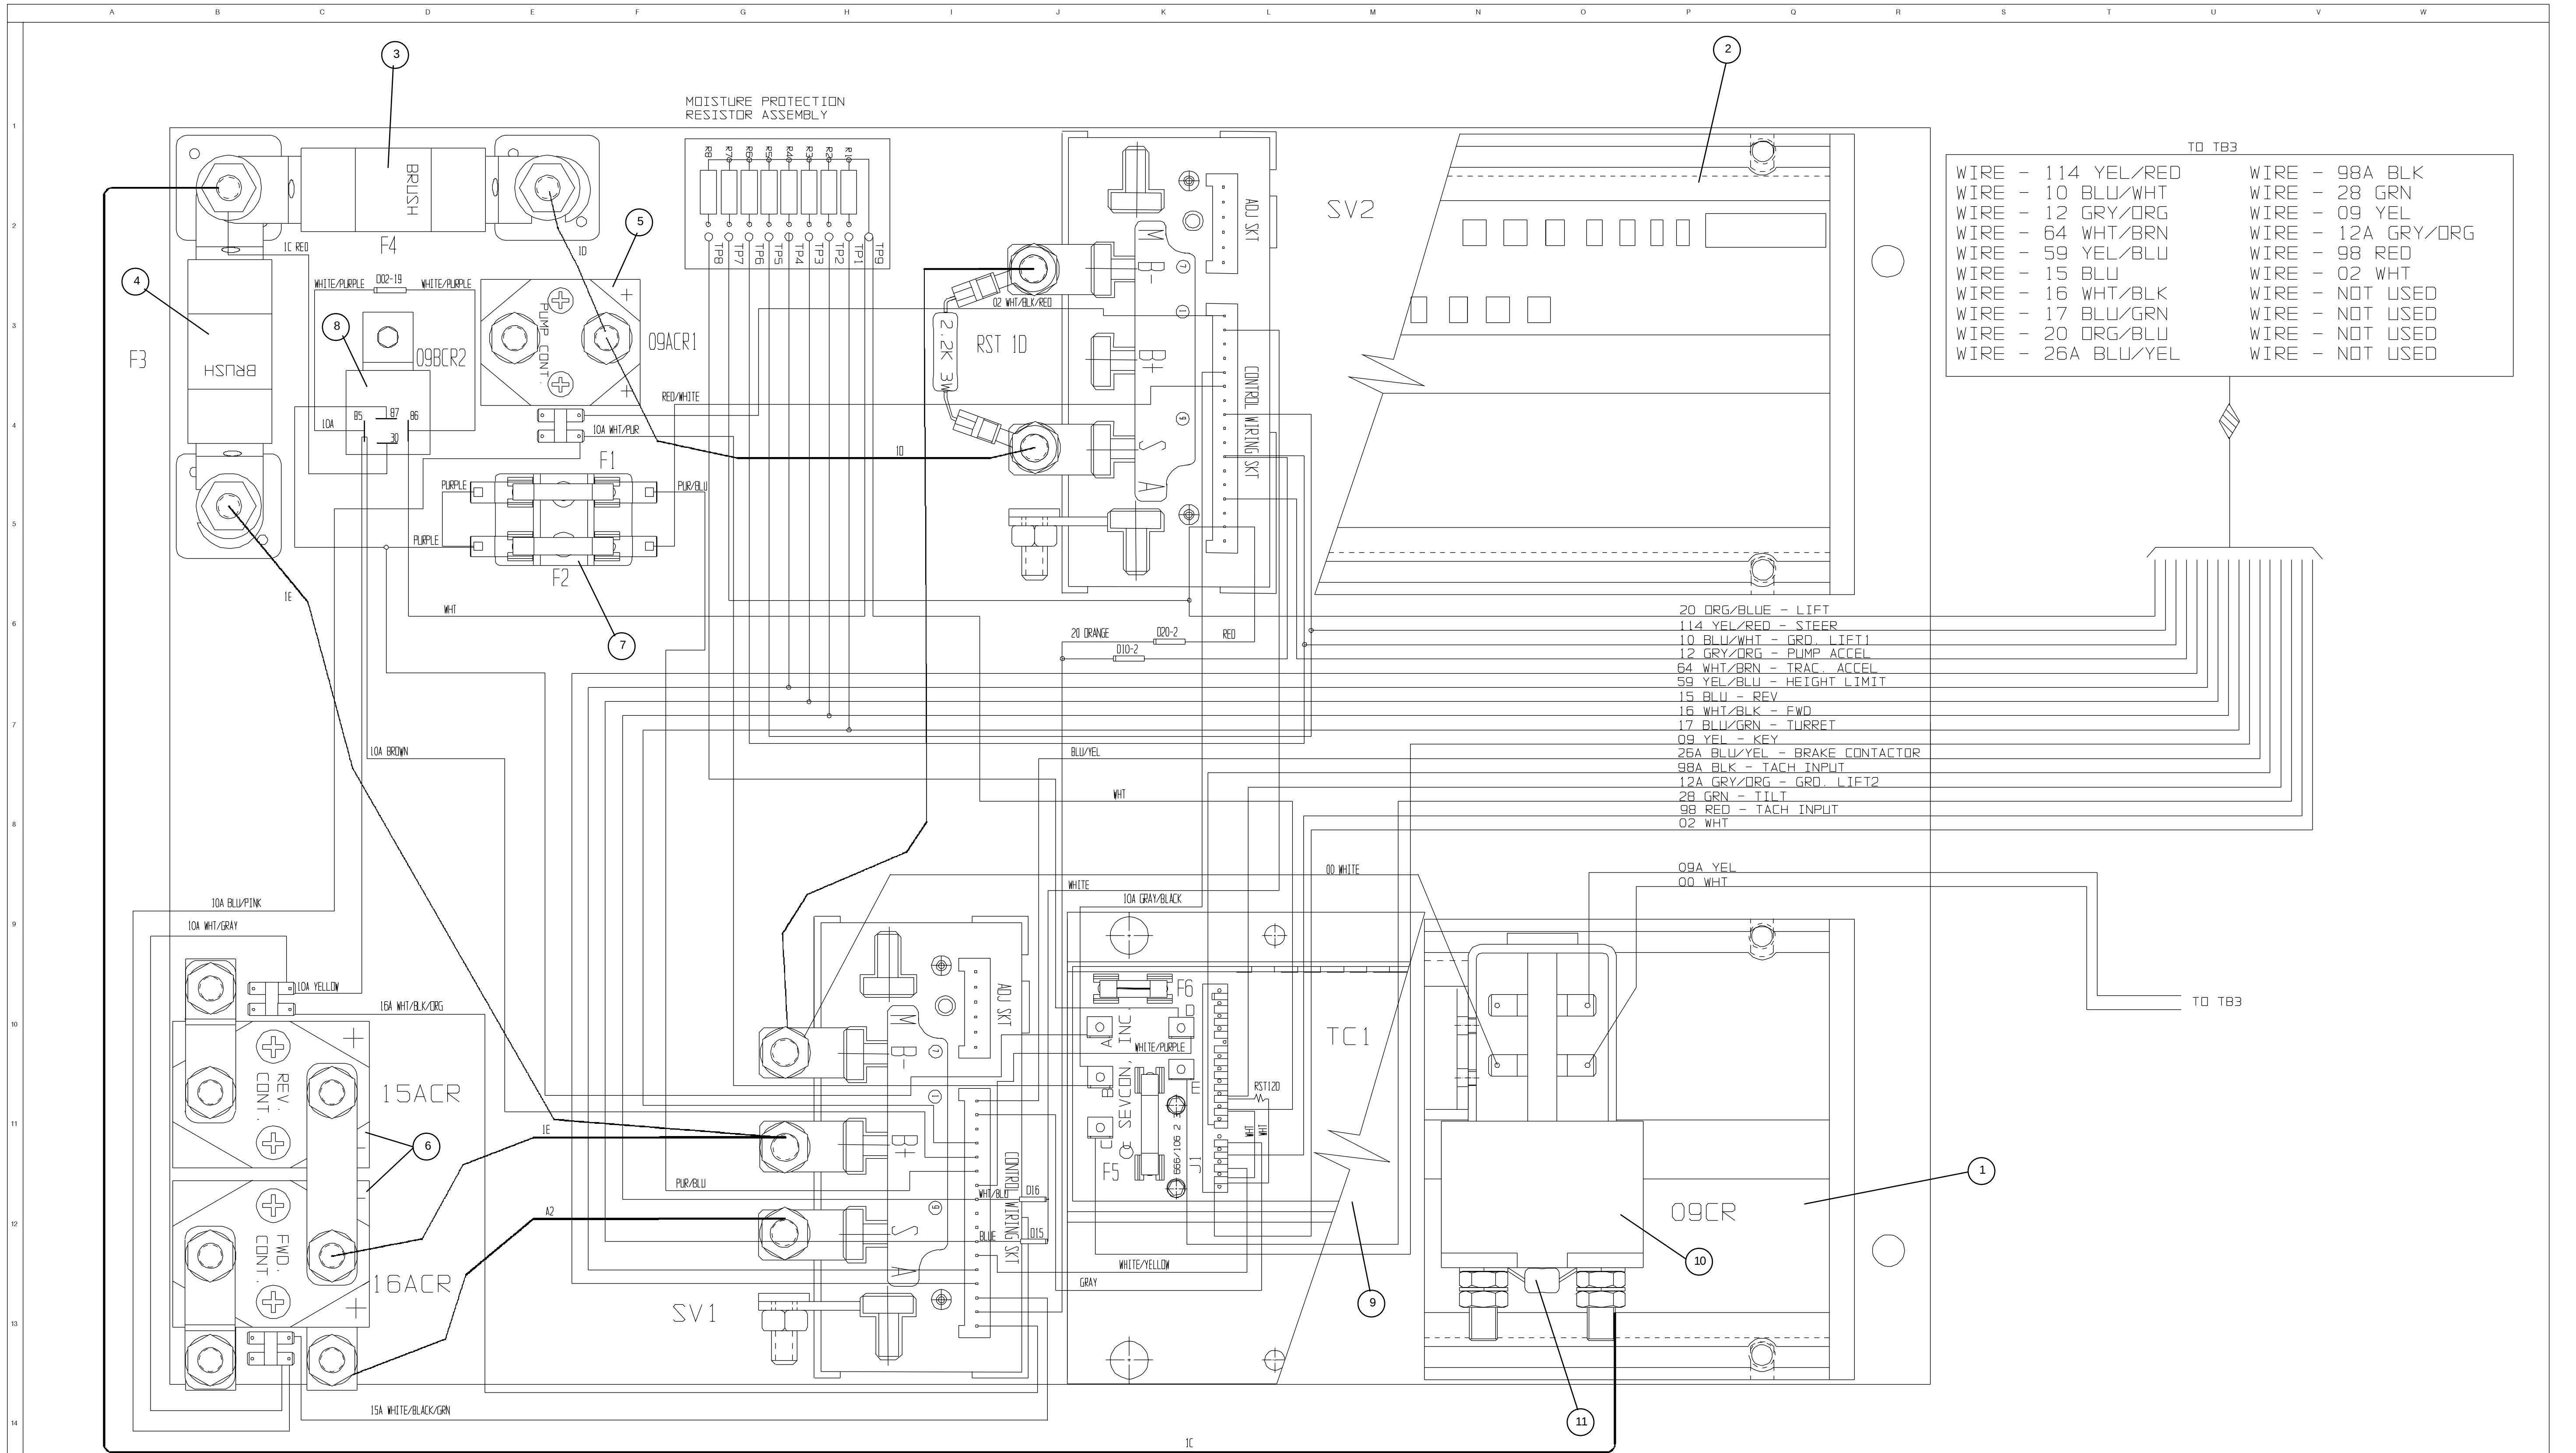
MOTOR CONTROLLER PANEL DIAGRAM PARTS LIST
